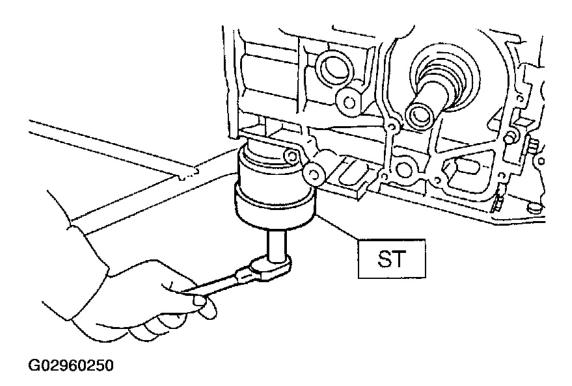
Installing Oil Filter Using ST Courtesy of SUBARU OF AMERICA, INC.
